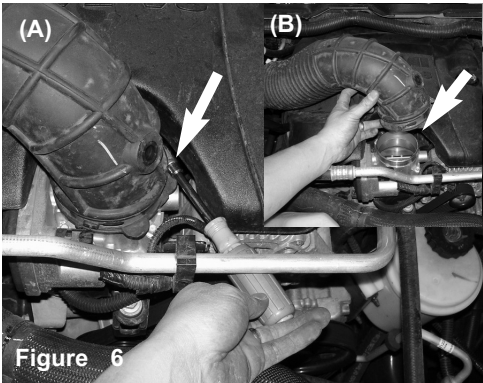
(A) Use a 8mm nut driver and loosen clamp on air duct connected to throttlebody.
